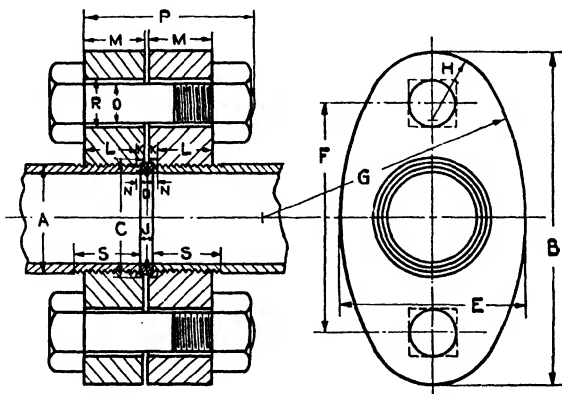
British Standard Oval Steel Flanges for Steel Pipes: Working Pressures from 750 up to 1,500 lb. per sq. in.
